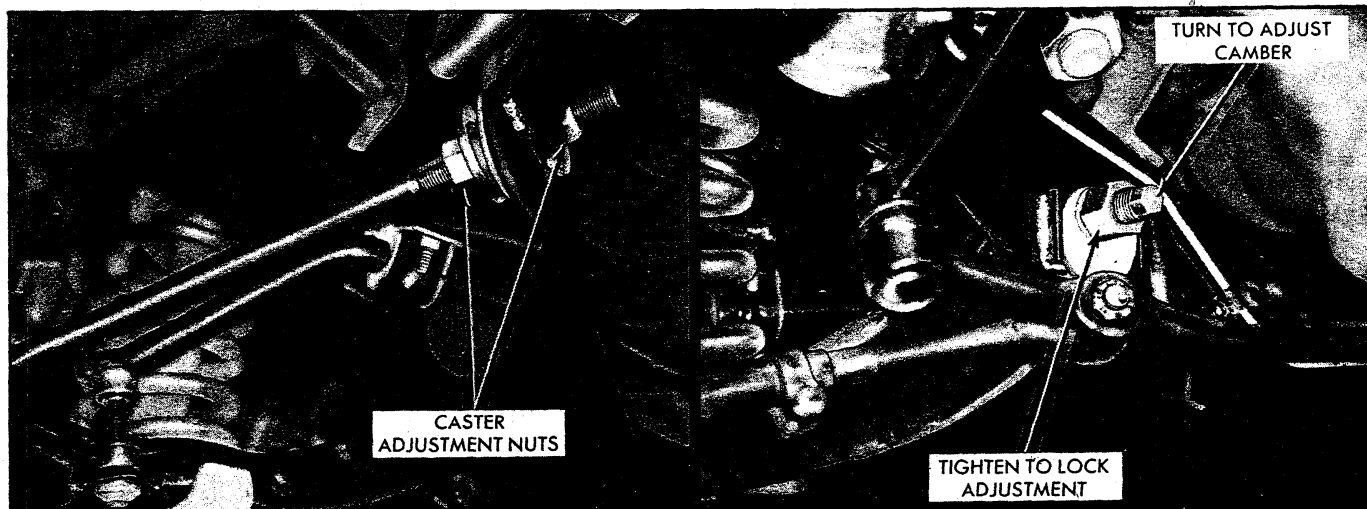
Caster and Camber Adjustment Points - Chevrolet
